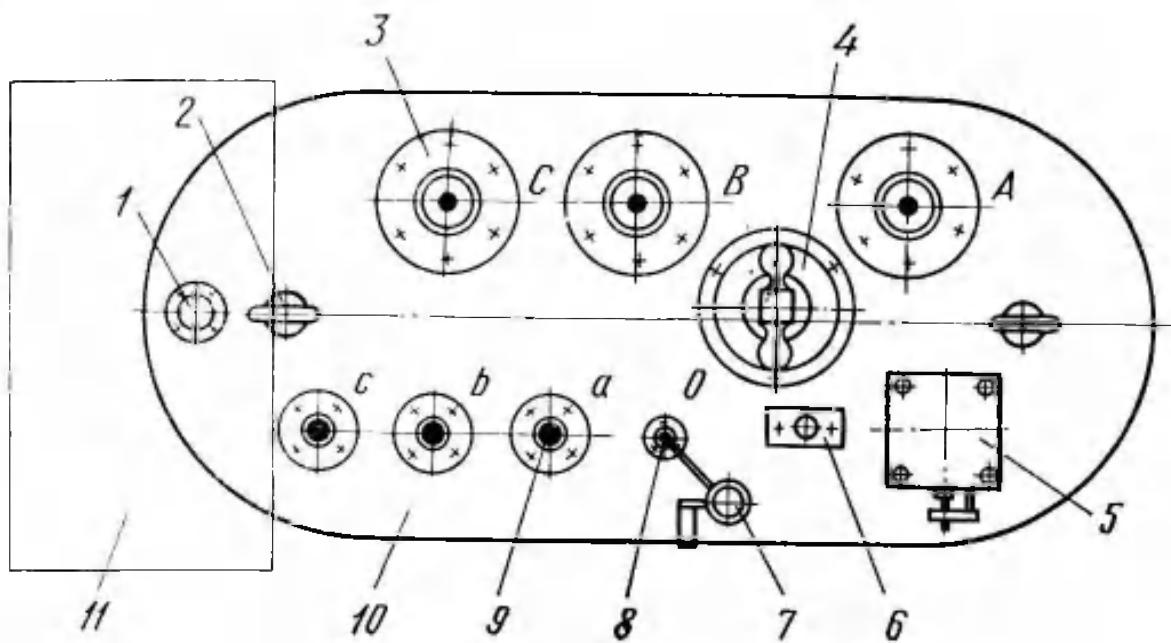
Tank cover of the Type TM-400/10 transformer (plan view)
